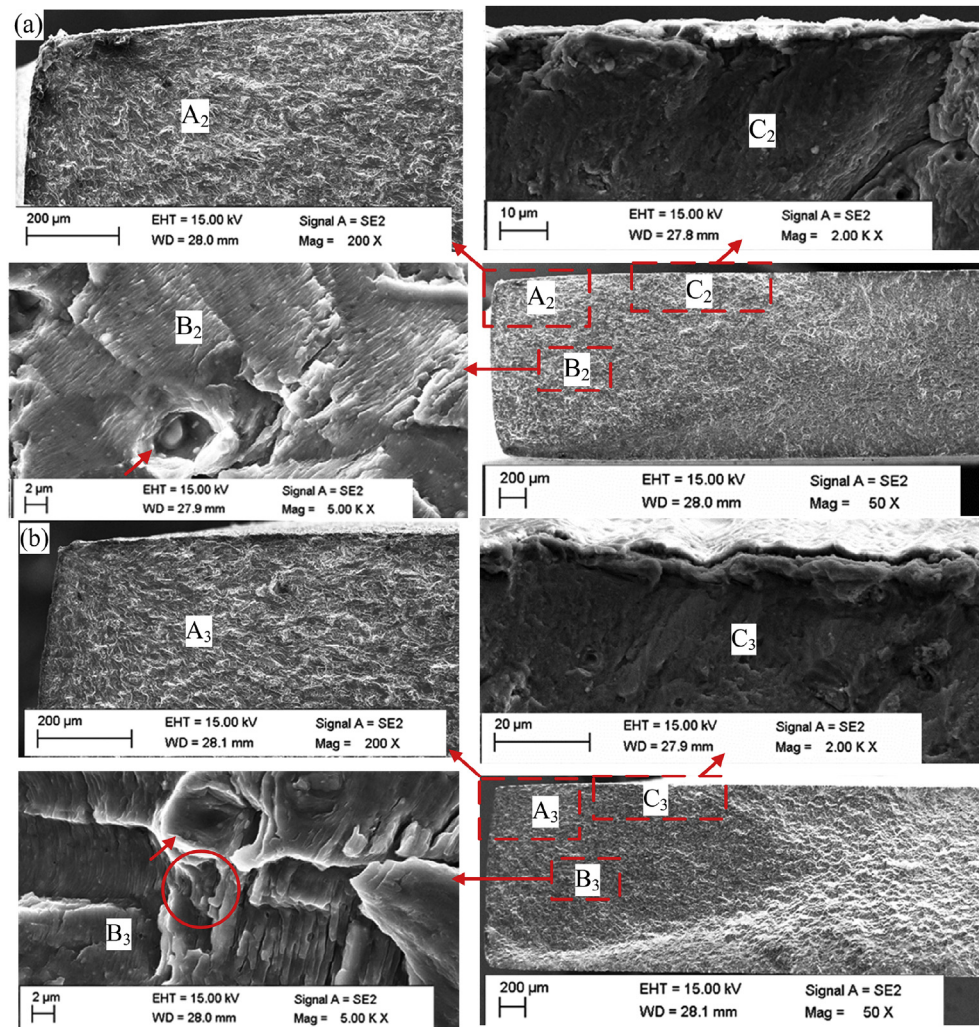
The fatigue fracture surface morphology of (a) sample a, (b) sample c.
